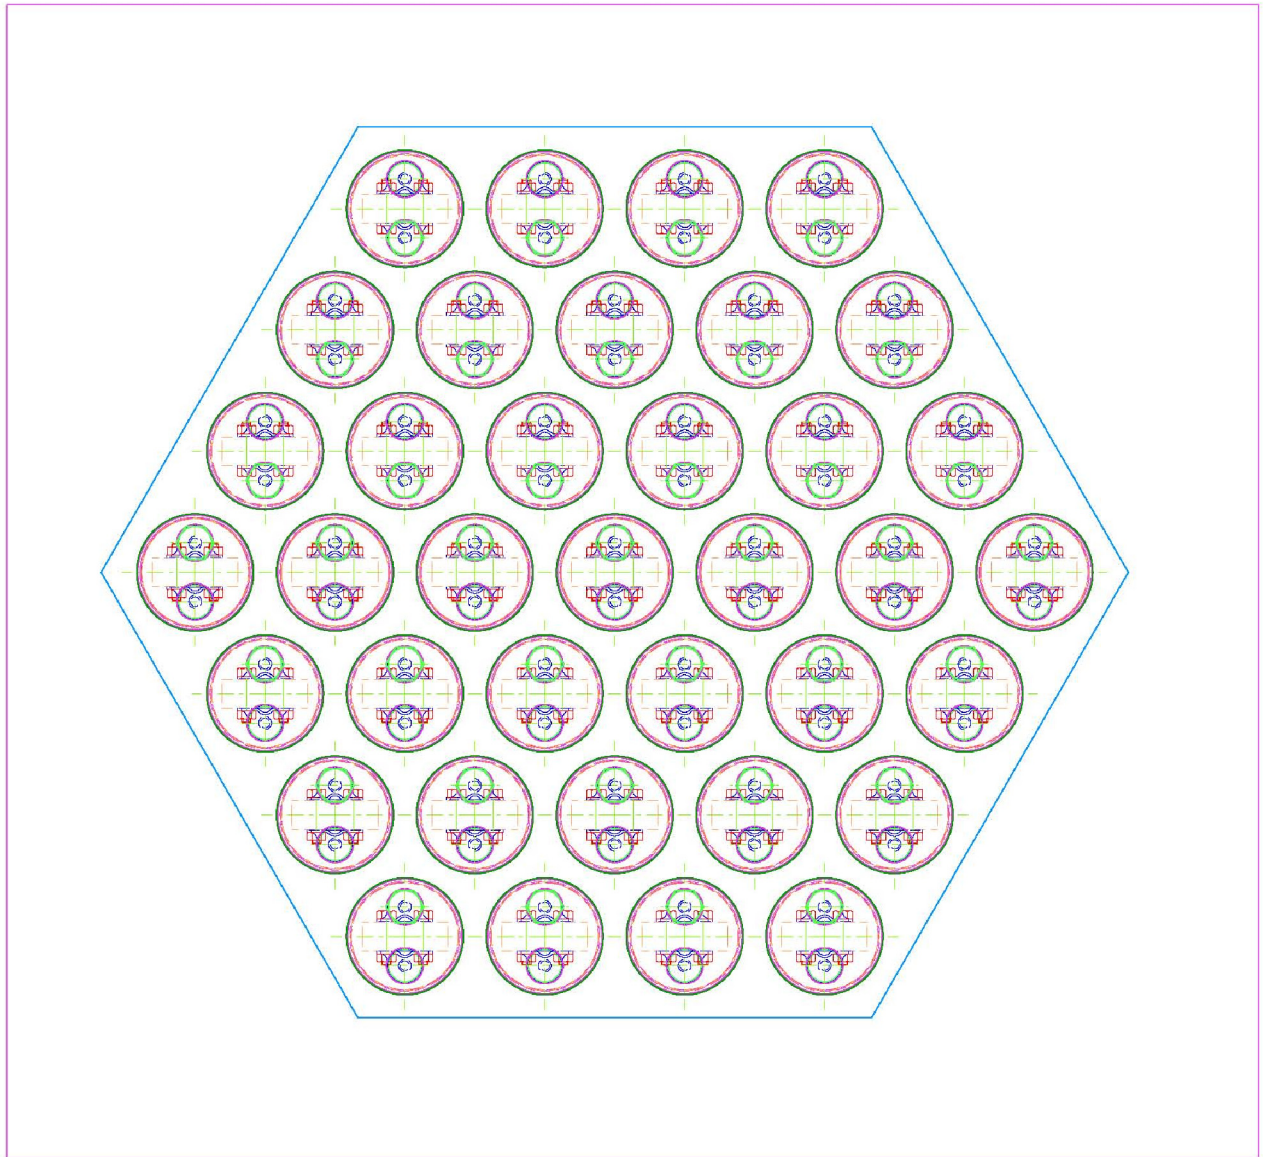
Cross-sectional view showing heater element pin formation for modified power interface.
